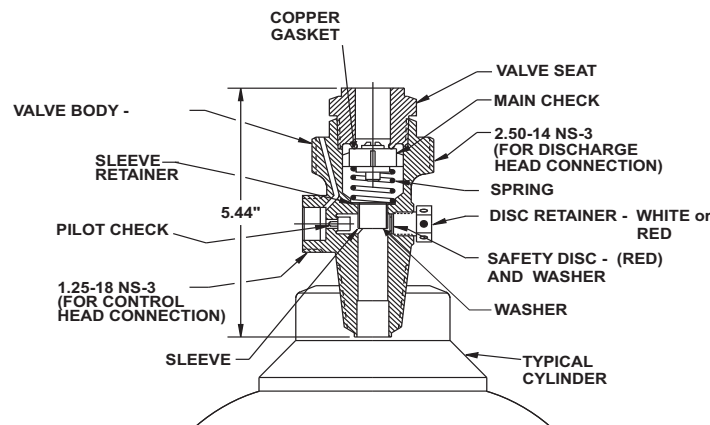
5/8-inch I-Valve for Nitrogen Cylinder
